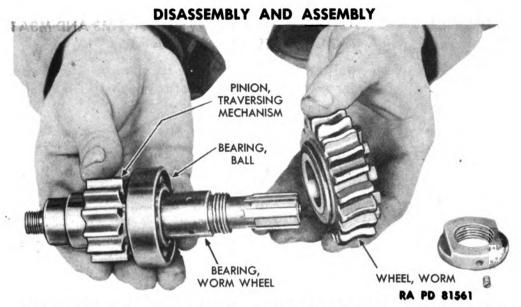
Removing the Worm Wheel and Worm Wheel Bearing from the Traversing Mechanism Pinion
